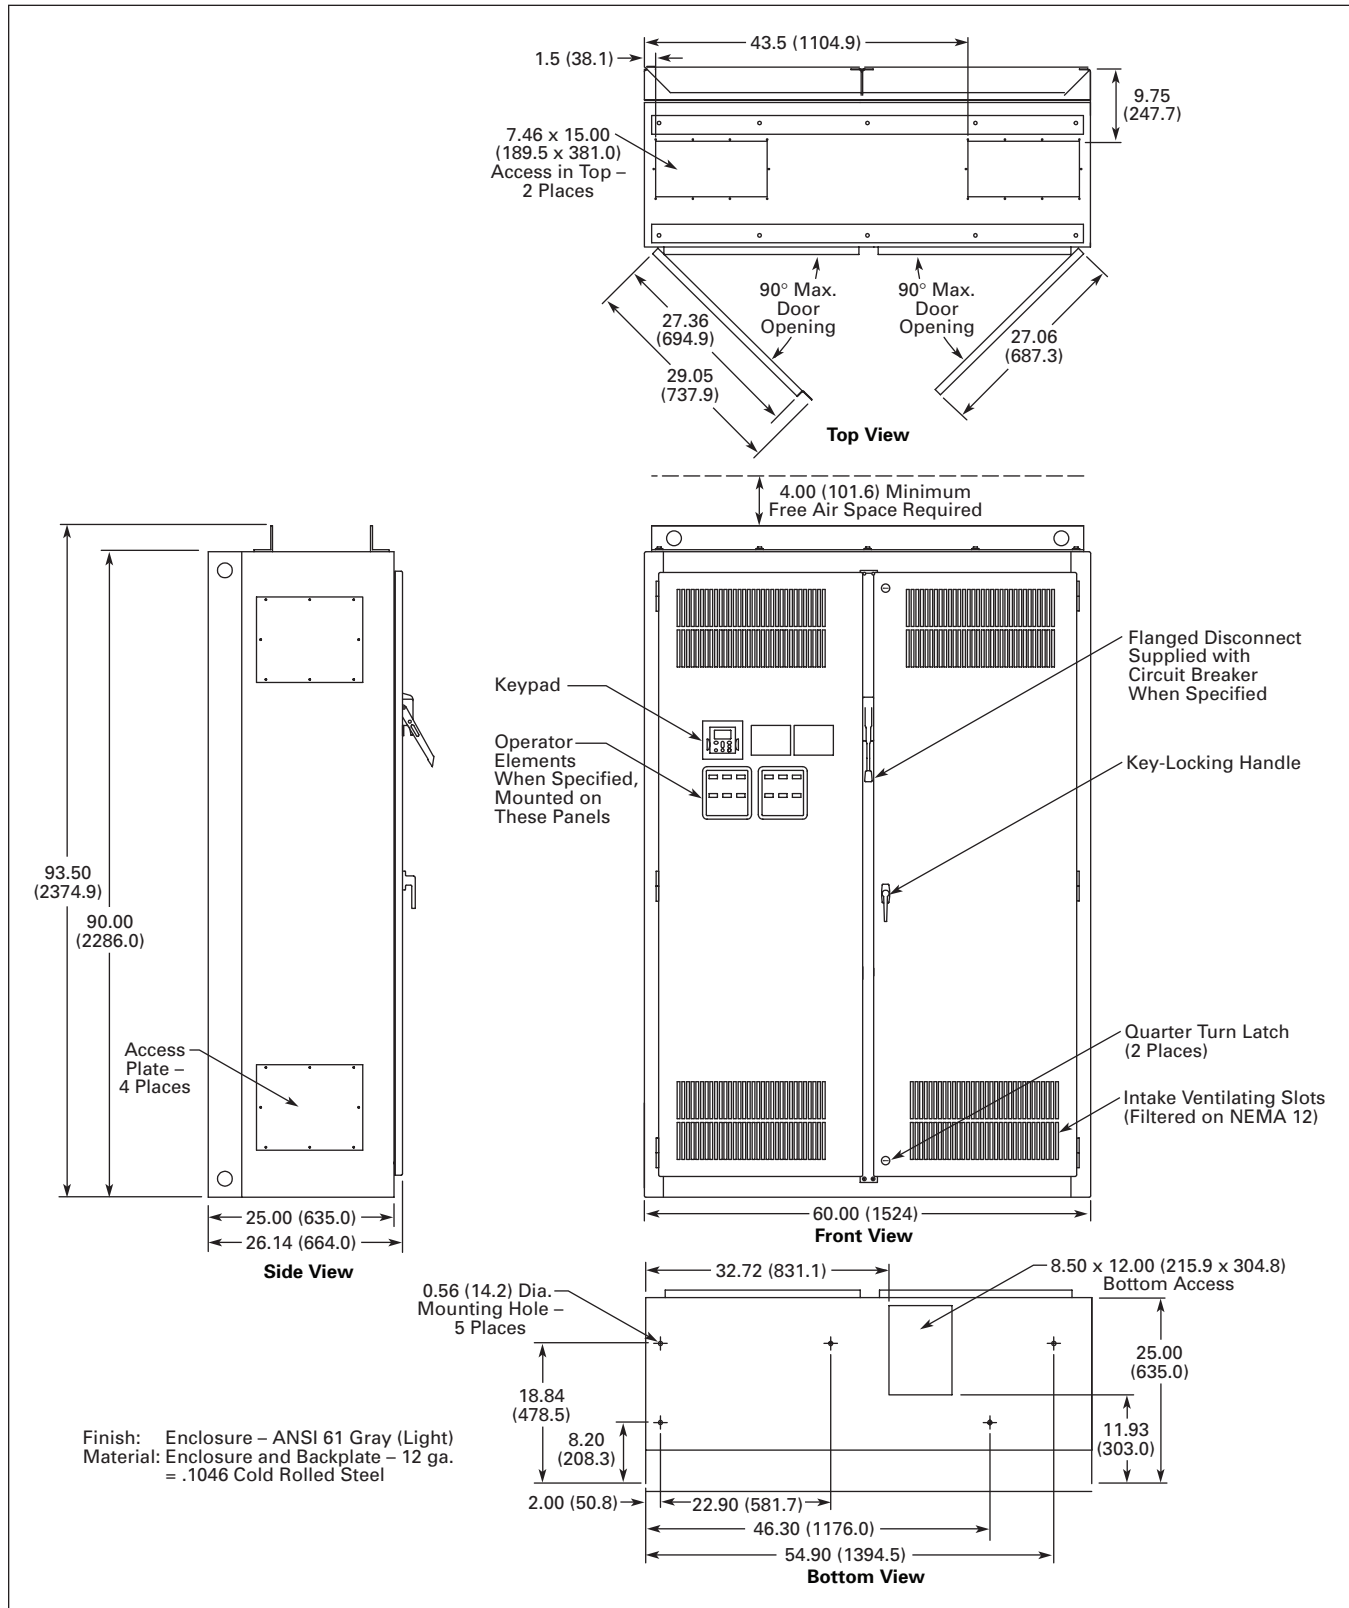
300–400 hp I_L and 250–350 hp I_H—Approximate Dimensions in Inches (mm)
